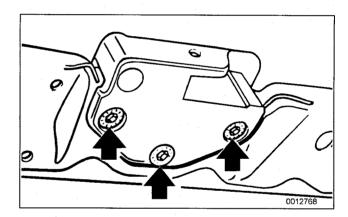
Visor latch plate is held to top of windshield with three bolts (arrows).
